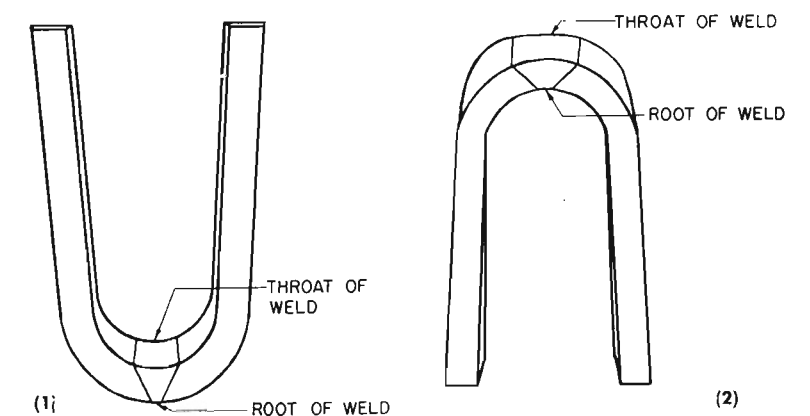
Examples of satisfactory guided-bend tests of butt welds.
